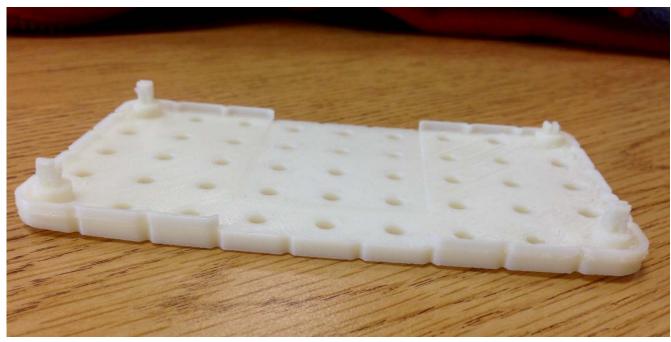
Final 3D printed part (first draft-one pin broke after printing)
